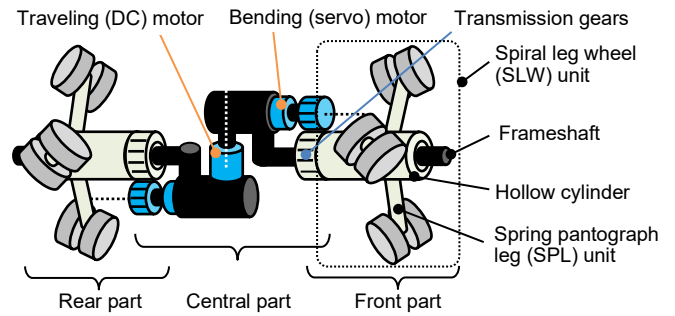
Simplified schematic SPIRA, consisting of front, central, and rear parts. Two spiral leg wheel (SLW) units are in front and rear parts, and single bending joint (SBJ) is in central part. SLW unit has three wheels and spring pantograph leg (SPL) units to adapt to small steps in sockets and diameter changes in elbow joints. Each SPL unit rotates around frameshaft.
